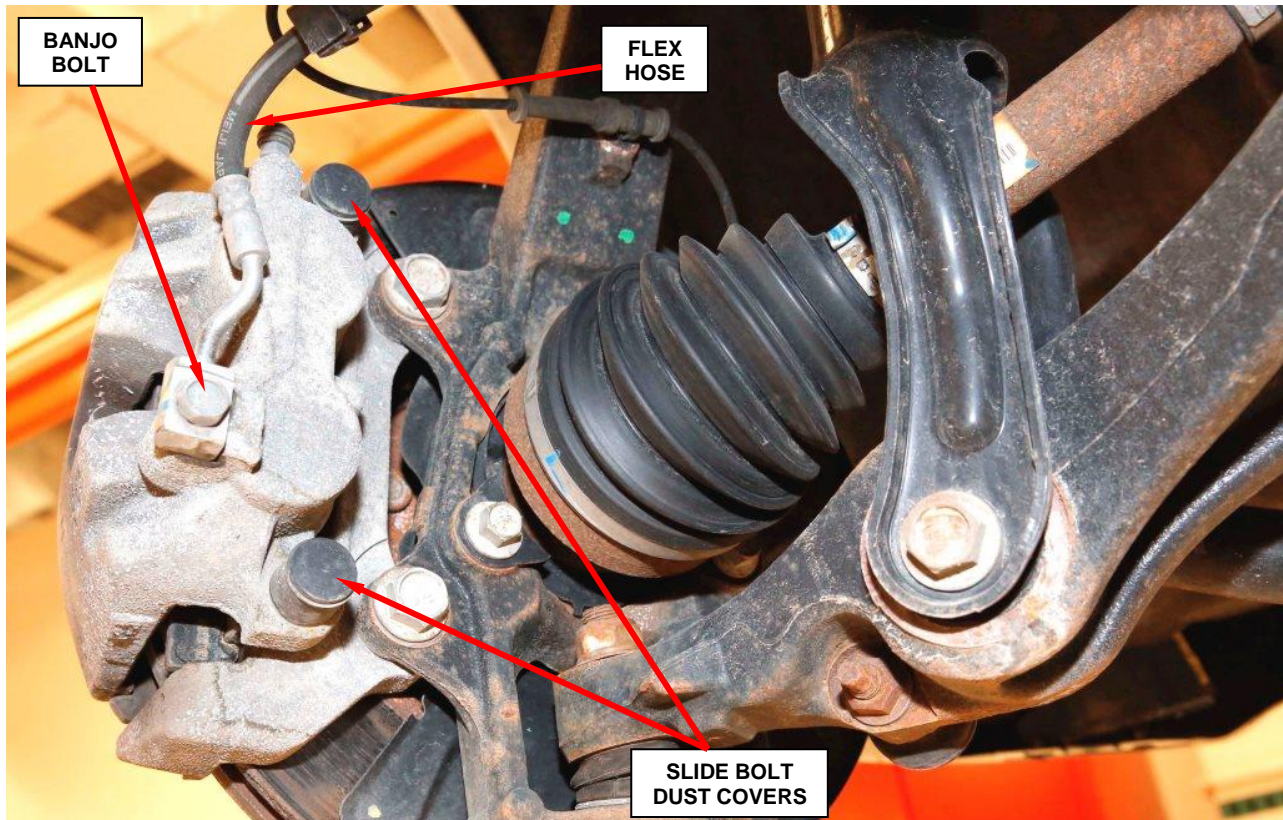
Brake Caliper Flex Hose Banjo Bolt and Slide Bolt Dust Covers
